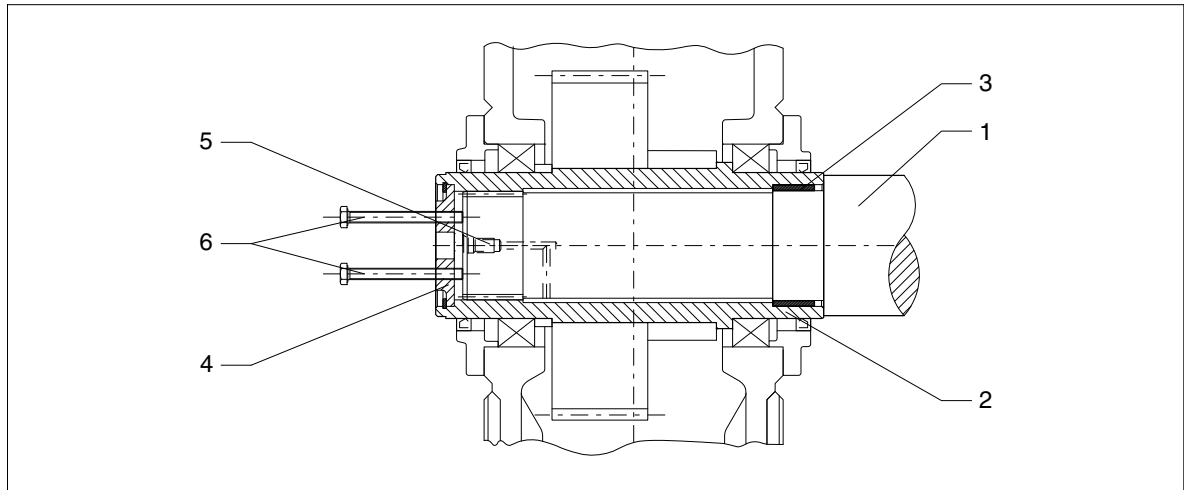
Hollow shaft with internal spline, demounting with end plate
